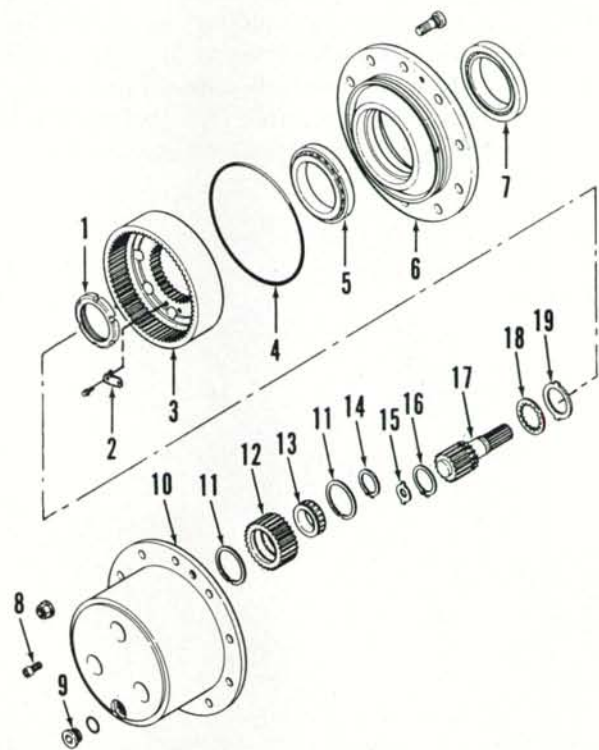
Exploded view of wheel hub and planetary unit used on front drive axle.
